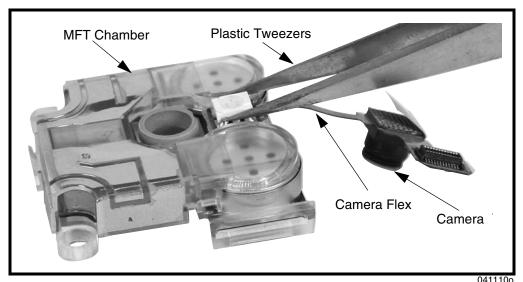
Removing and Replacing the Camera From the MFT Chamber Assembly
